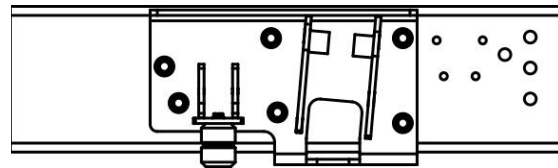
Driver Side (LH) Upper Strut Mount Installation.
